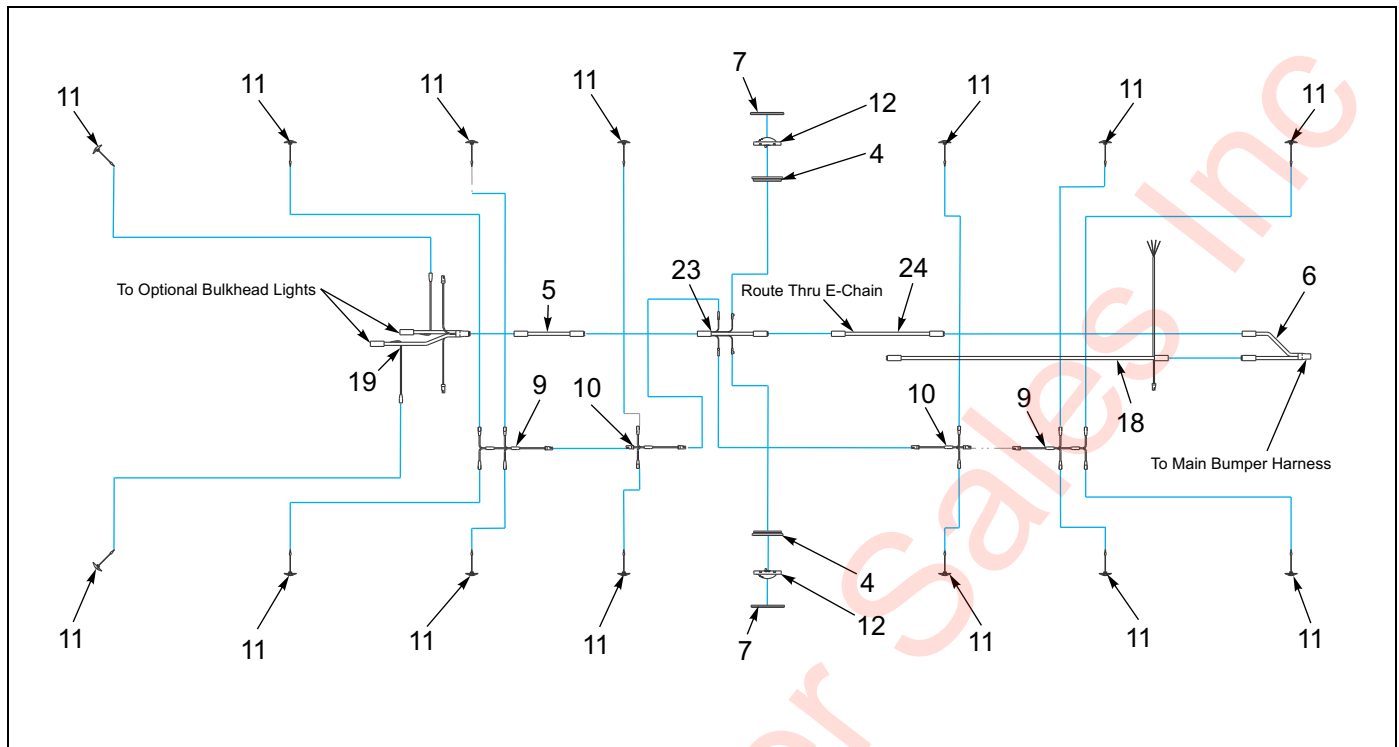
Long Bed Frame Assembly (2 of 2)
